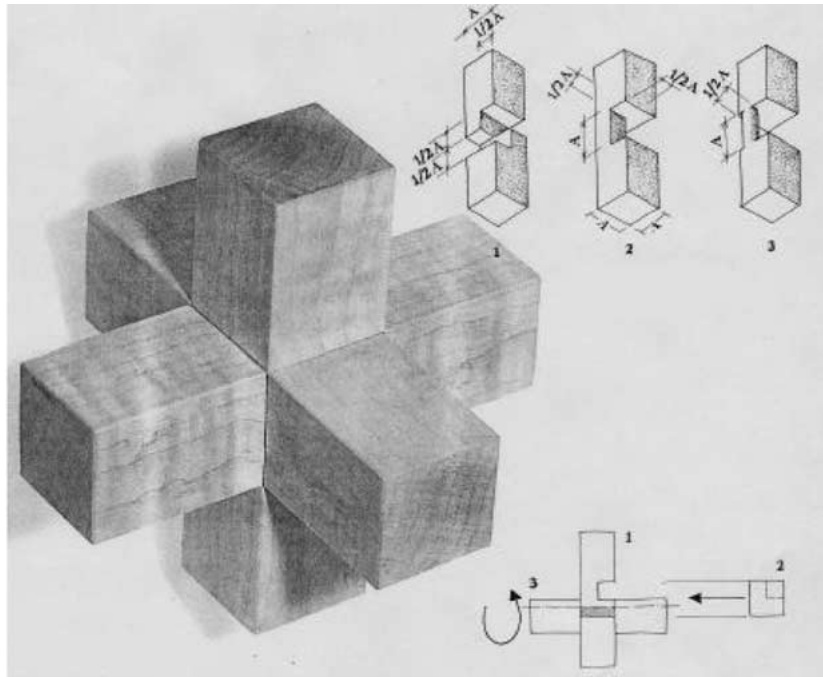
A burr puzzle design (from (Slocum and Botermans, 1992)). The puzzle shown is constructed in wood, from pieces diagrammed in the upper right corner of the figure; but pieces of a similar design could conceivably be printed in plastic on a three-dimensional printer.
